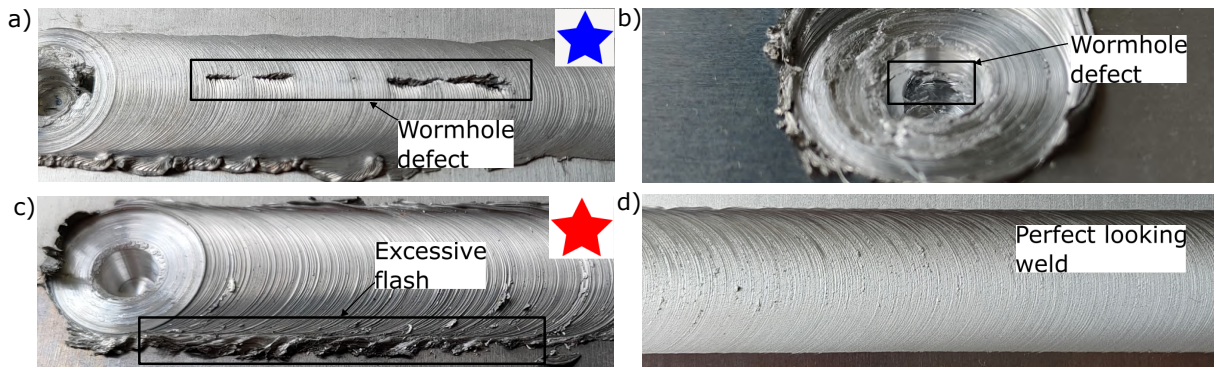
The symbols shown on welds are tied to Figure III.1. (a) Weld showcasing a clear case of wormhole. (b) Cavity at the bottom of the exit hole, hinting at the presence of a wormhole throughout the weld. (c) Weld exhibiting more flash compared to a similarly manufactured but faster weld. (d) Joint with an appropriate post-weld surface.
